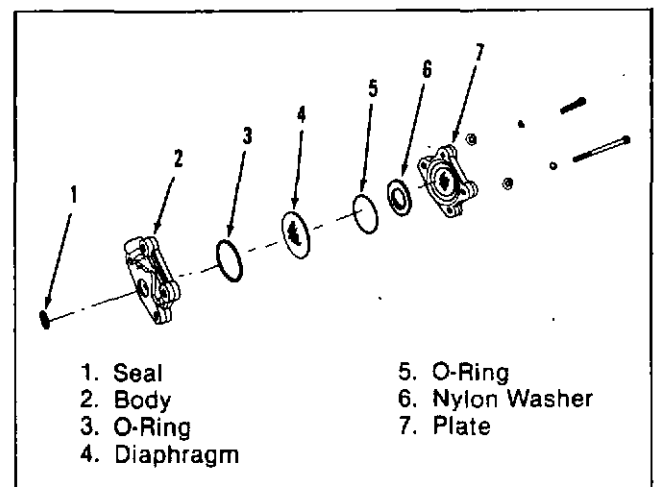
, (F5132). Fuel damper — disassembled view.
